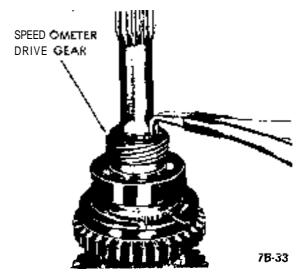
B.33 Removing Snap Ring Behind Speedometer Drive Gear
